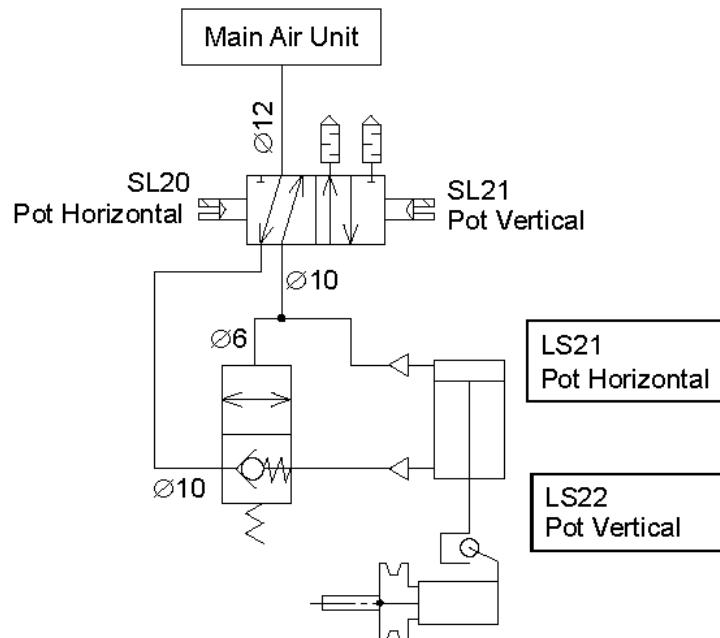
Tool Pot Horizontal/Vertical Pneumatic Cylinder
